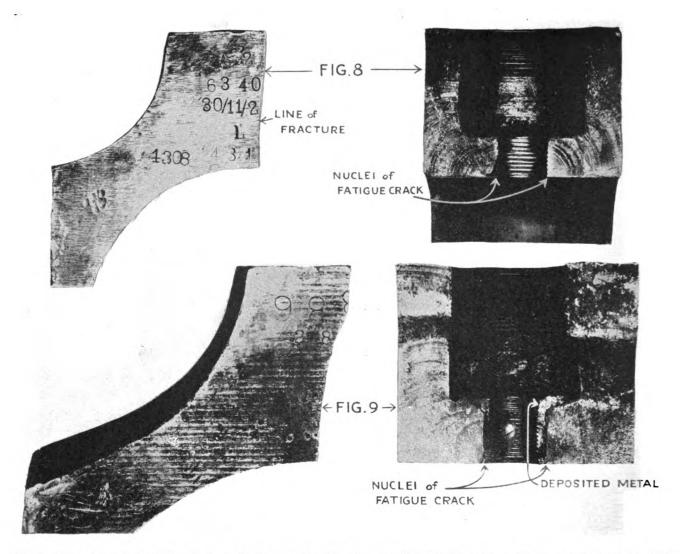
The progress of the fatigue cracks is clearly shown for this main rod, which failed in service. Fig. 9—Deposited metal to fill the grease plug hole complicated conditions in this broken side rod
